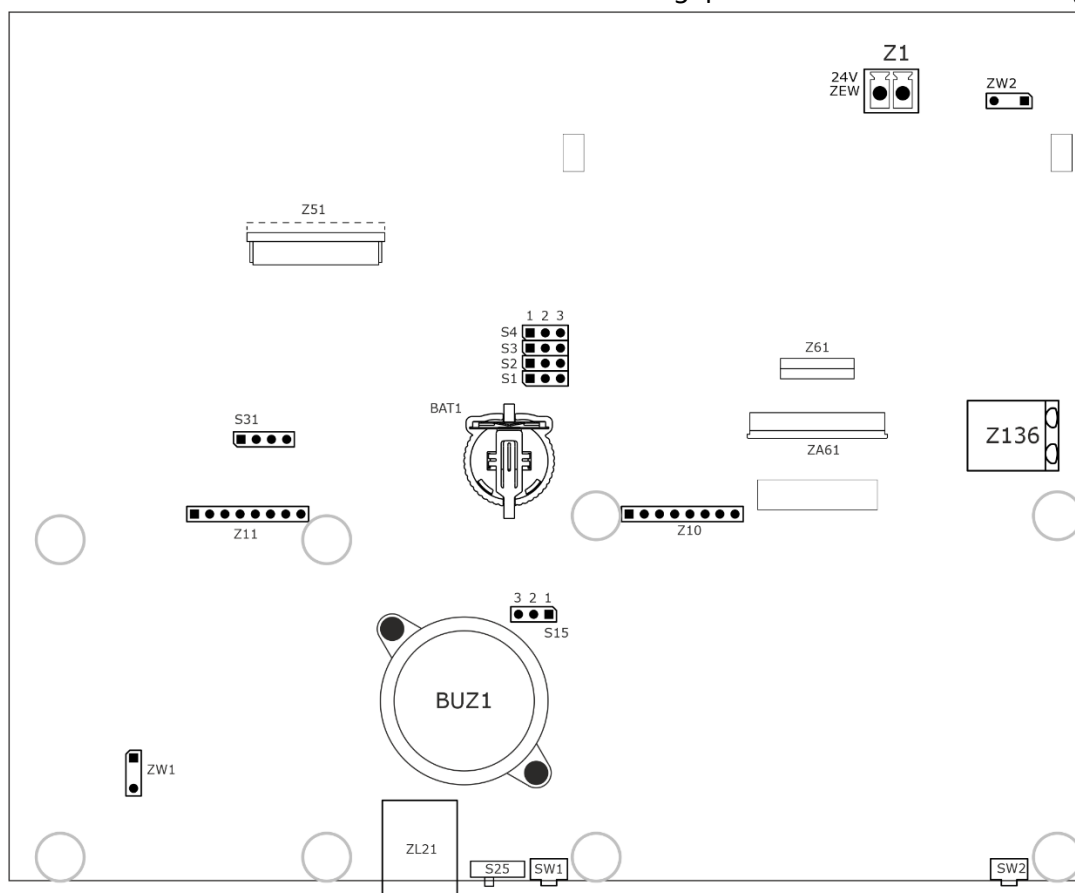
show the arrangement of the main components on the PCB of the MSO-30 module. Fig. 5-6 - the way of connecting the alarm devices and marking the relay outputs.
